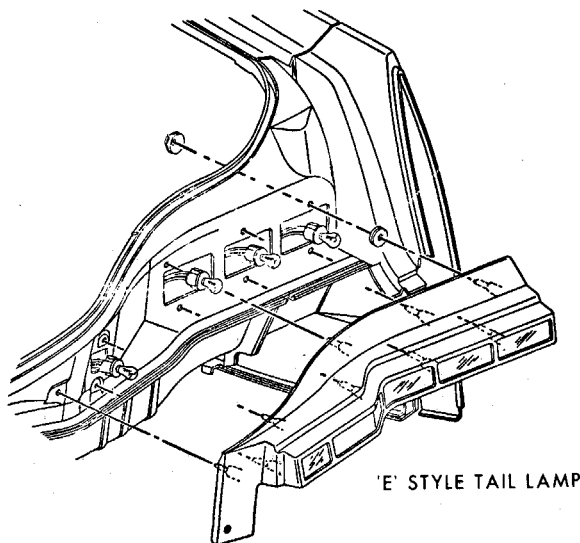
Exterior Lamp Installation - Pontiac Styles
